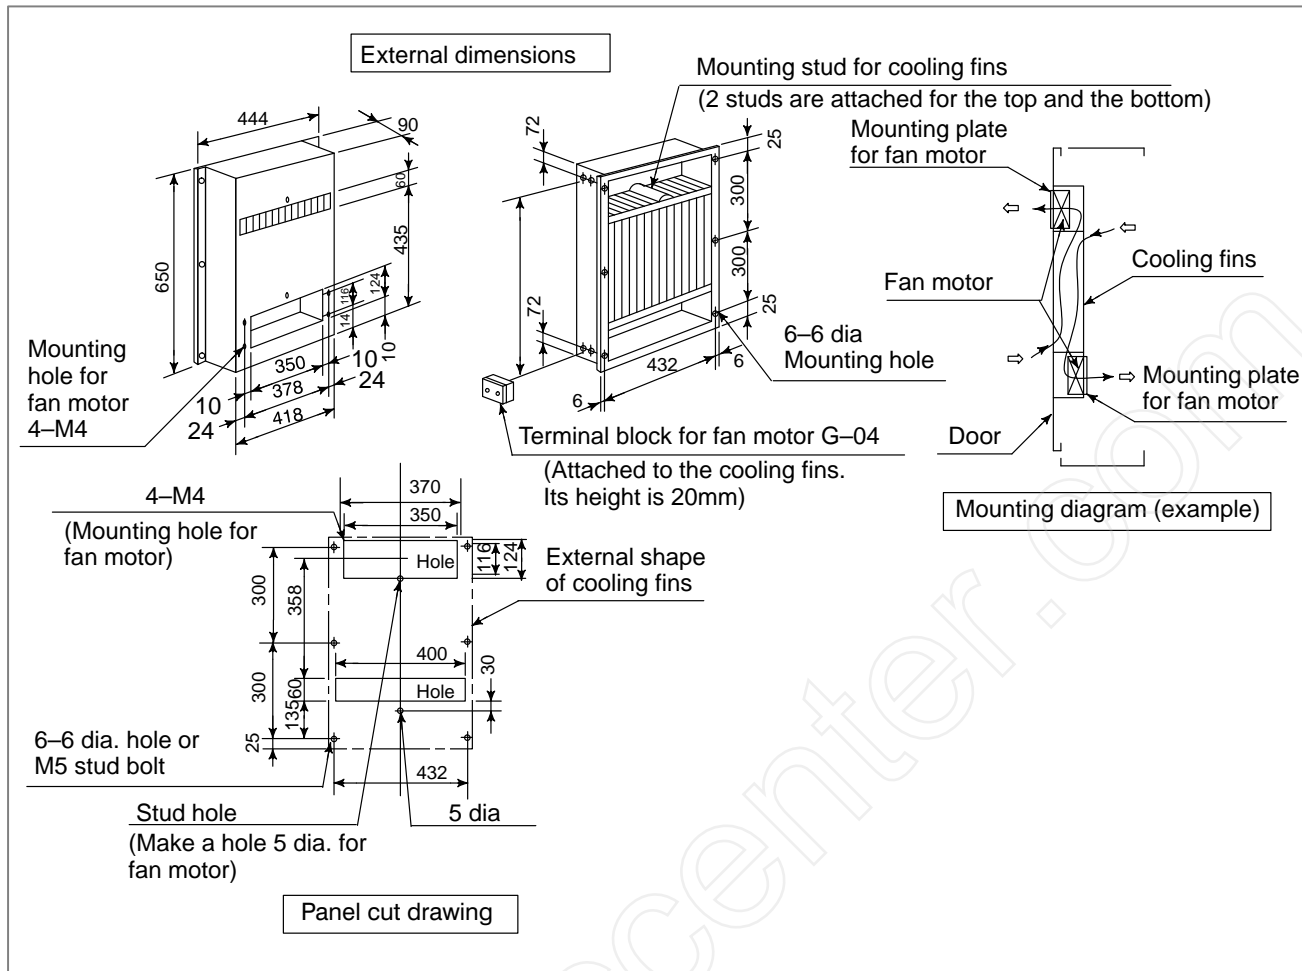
(d) External dimension and mounting method of cooling fin B (A02B-0053-K304)
